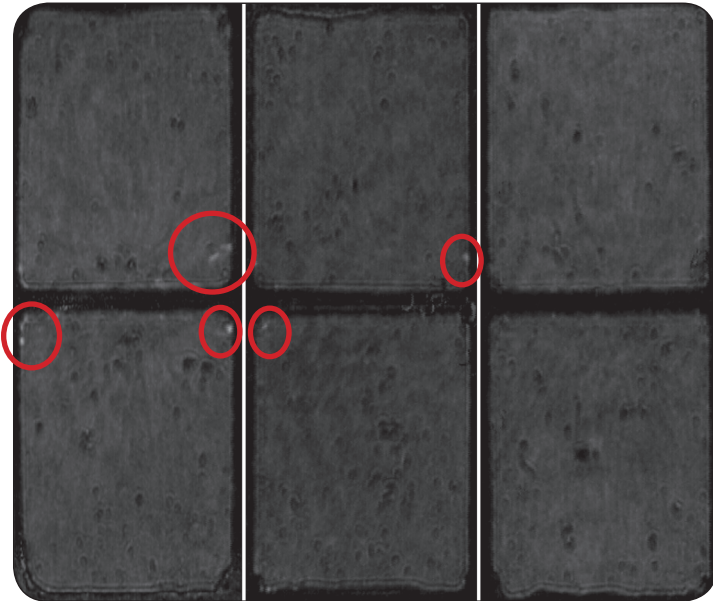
(a) 800 cycles; secondary SAM gate highlighting cracks in the solder layer for samples with Al wire bonds.
